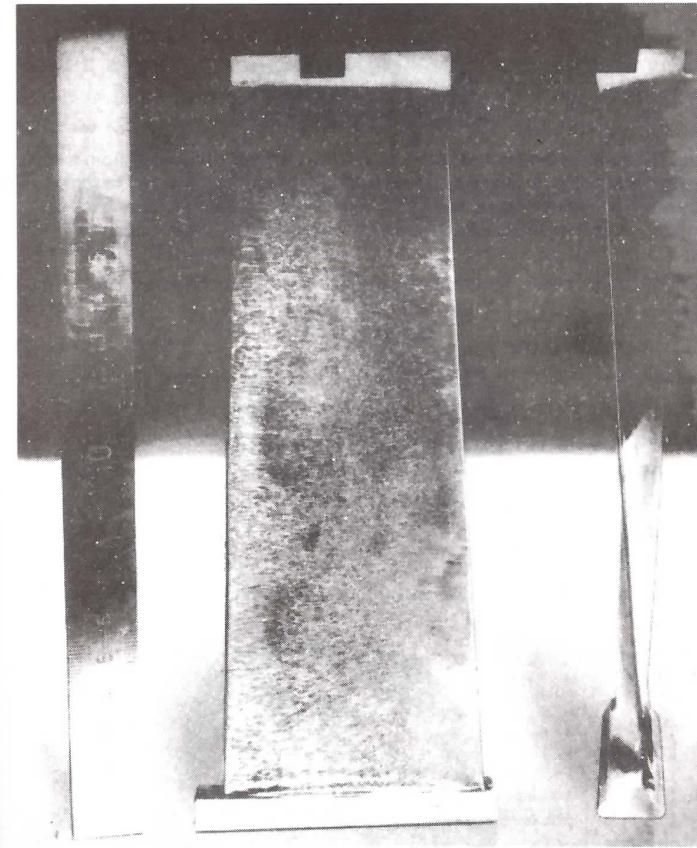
Aero-engine turbine blade (aerofoil sections) machined by ECM process
